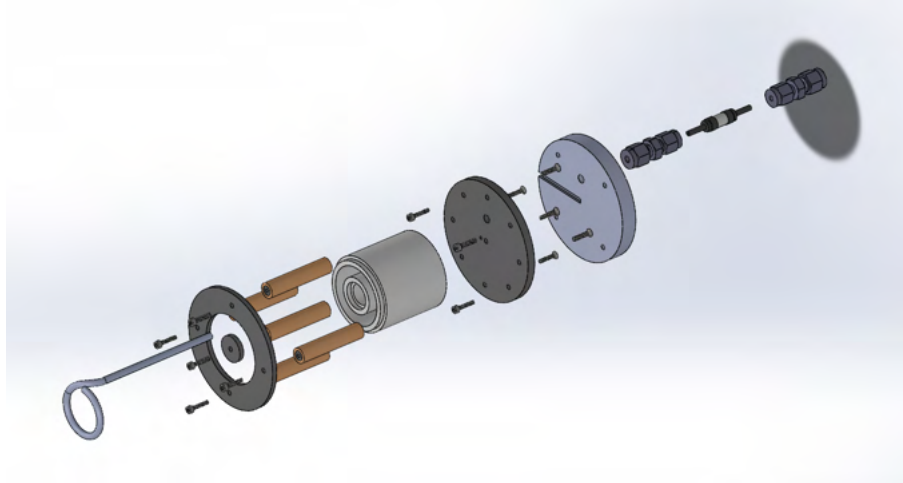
Exploded CAD view of the thruster assembly, showing channel insert, coils, magnetic circuit, and supporting structure.
